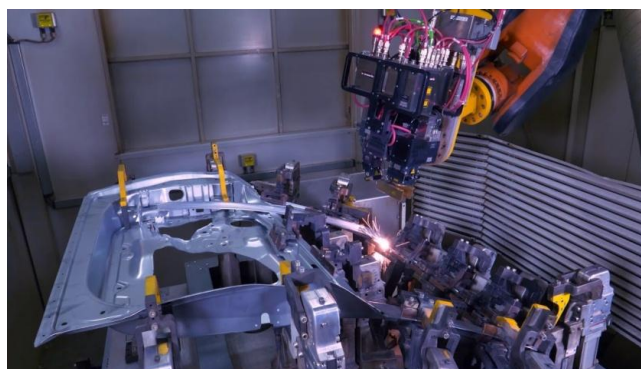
Remote laser welding of doors in series production of a major car manufacturer
